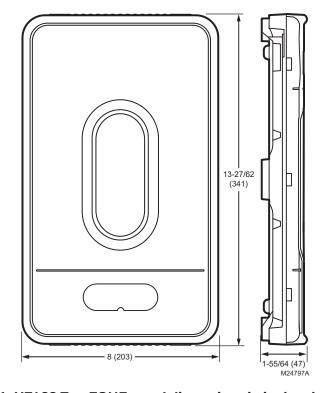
HZ432 TrueZONE panel dimensions in in. (mm).
